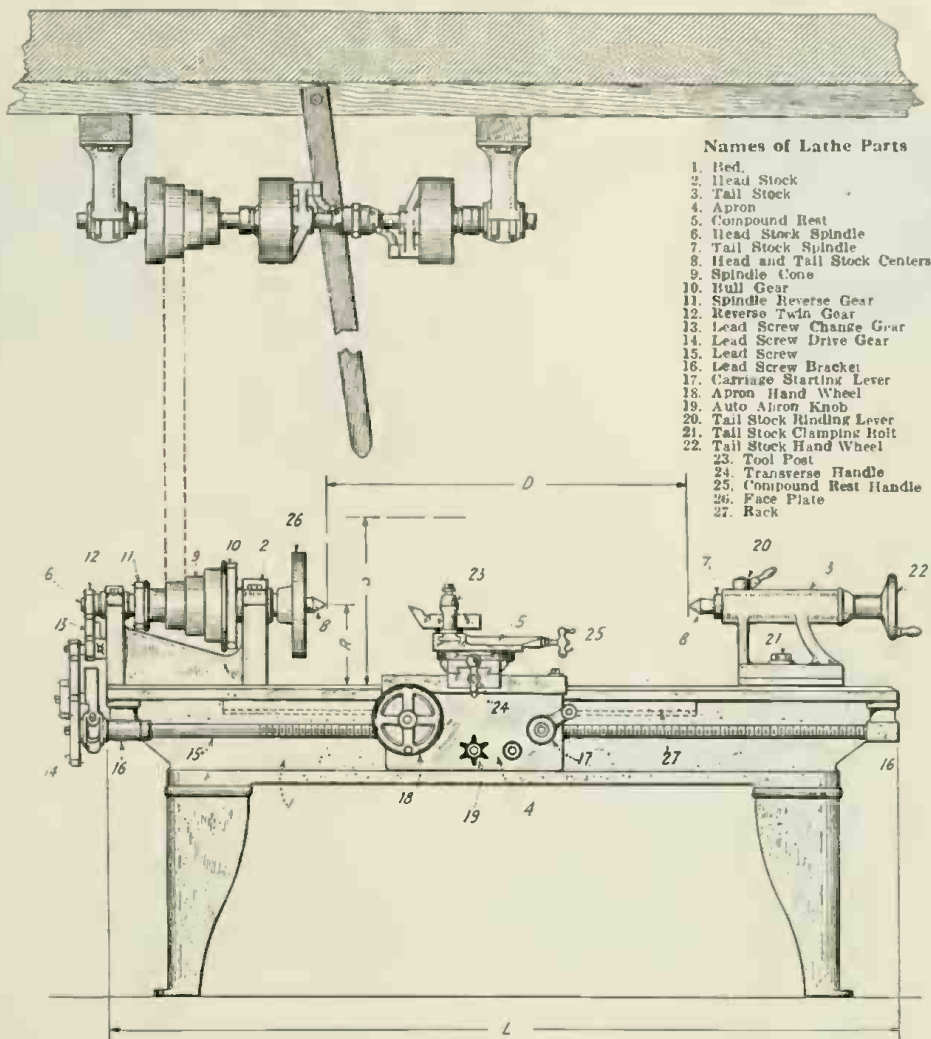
This View of a Modern Lathe Shows All the Principal Parts With Their Names, As Well As the Counter-shaft With Belt Shift and Clutch Pulley.
